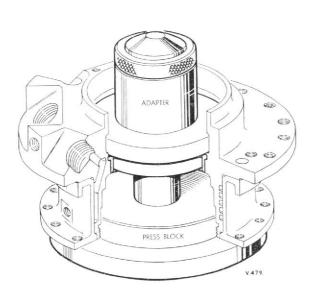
Pressing safety bearing into rear bearing housing with adapter T.78131 and press block T.78134.
